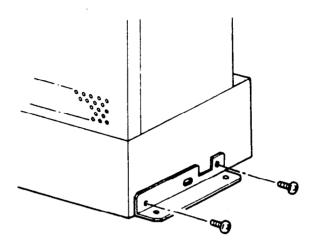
Attaching the Floor Mount Bracket to Basic KSU
